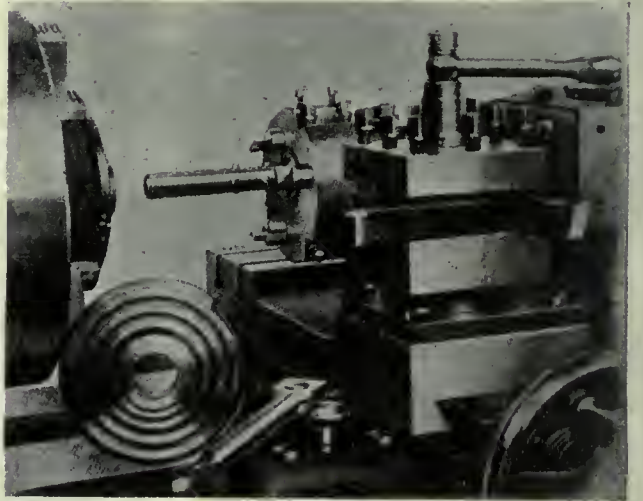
MACHINING THE GROOVES IN THE THRUST BLOCK WITH A SPECIAL TREPPANNING HEAD.
